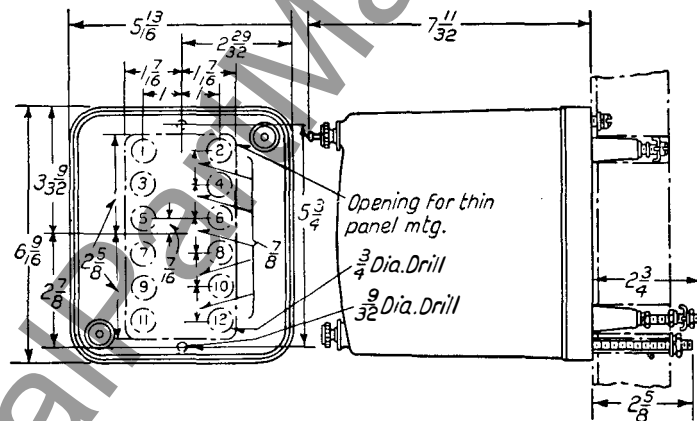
OUTLINE AND DRILLING PLAN FOR THE STANDARD
